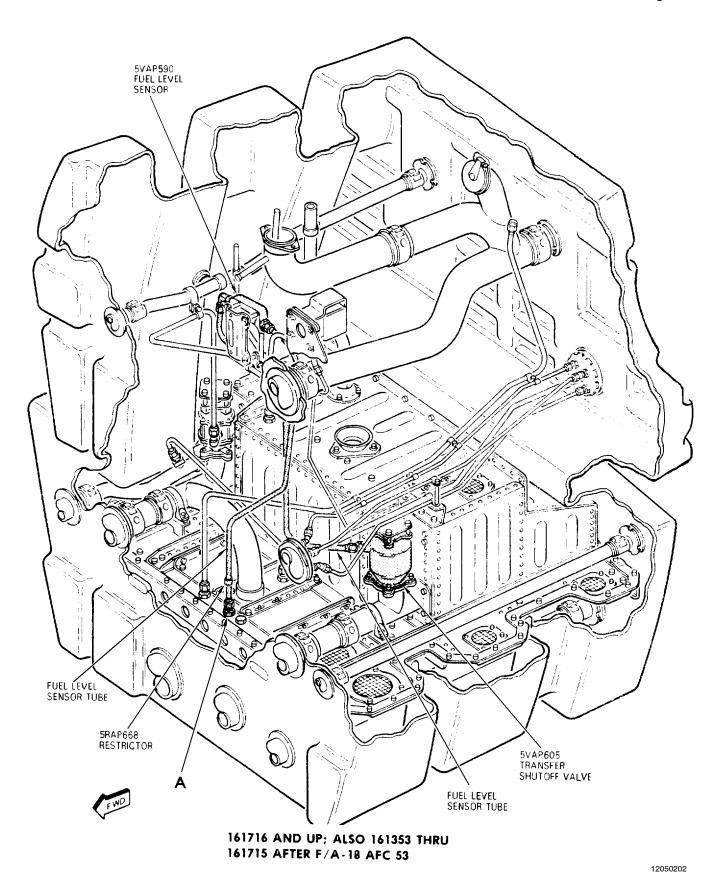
No. 3 Fuel Tank Cycle Test Troubleshooting Component Locator (Sheet 2)
